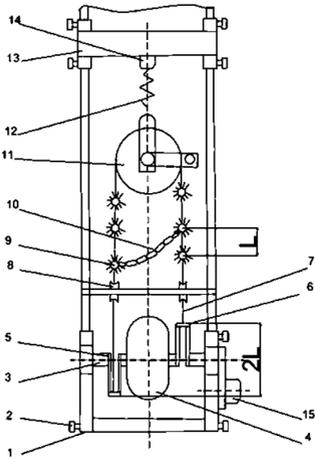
Device for cleaning gutters (top view): 1-mounting frame; 2-clamp; 3-shaft; 4-water wheel; 5-eccentric; 6-portable wallpaper; 7-thin wire; 8-blocks; 9-softeners; 10-wheel; 11-drum; 12-spring; 13-frame; 14-mobile pin; 15-mechanical drive.
